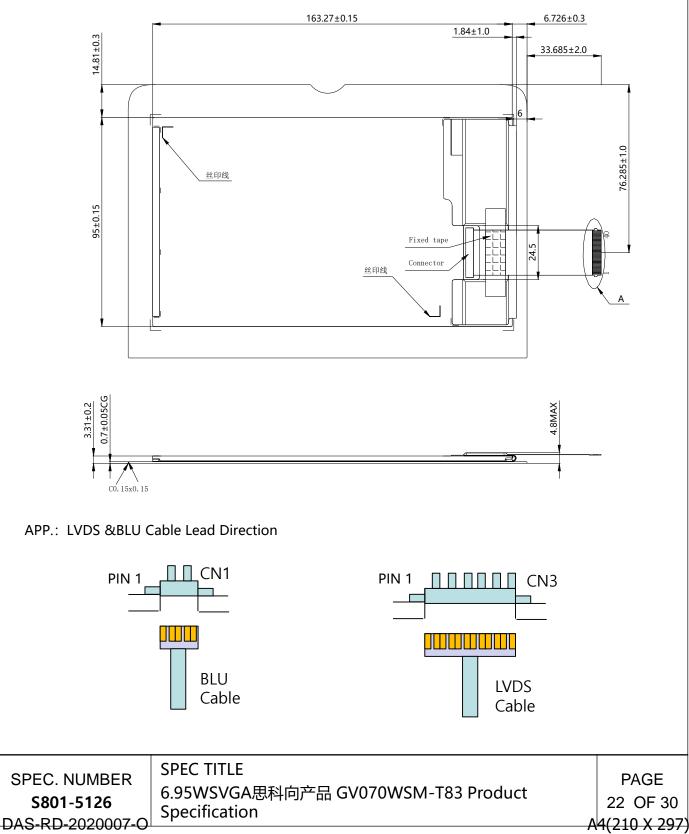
TFT-LCD Module Outline Dimensions (Rear view)
